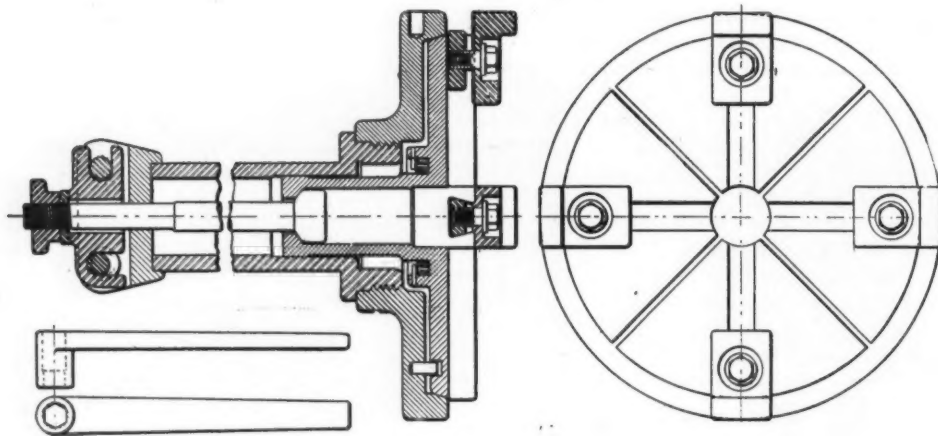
Sectional View of the Step Chuck and Closer with Adjustable Jaws.
